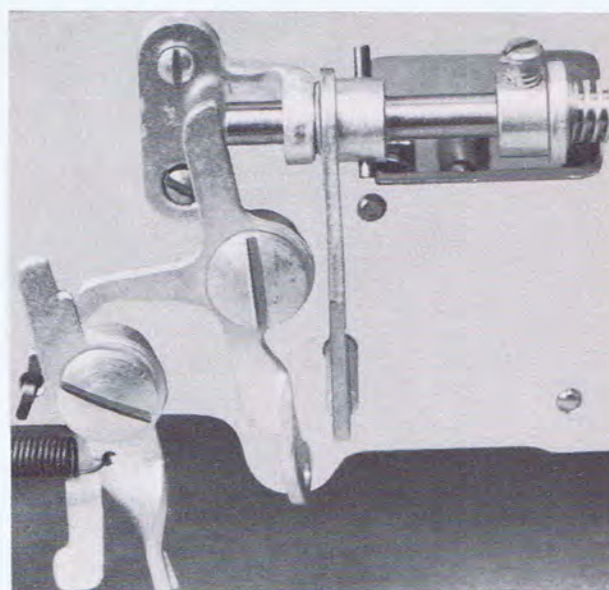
JUSTIFIER OPERATING SHAFT (Unlatched)
